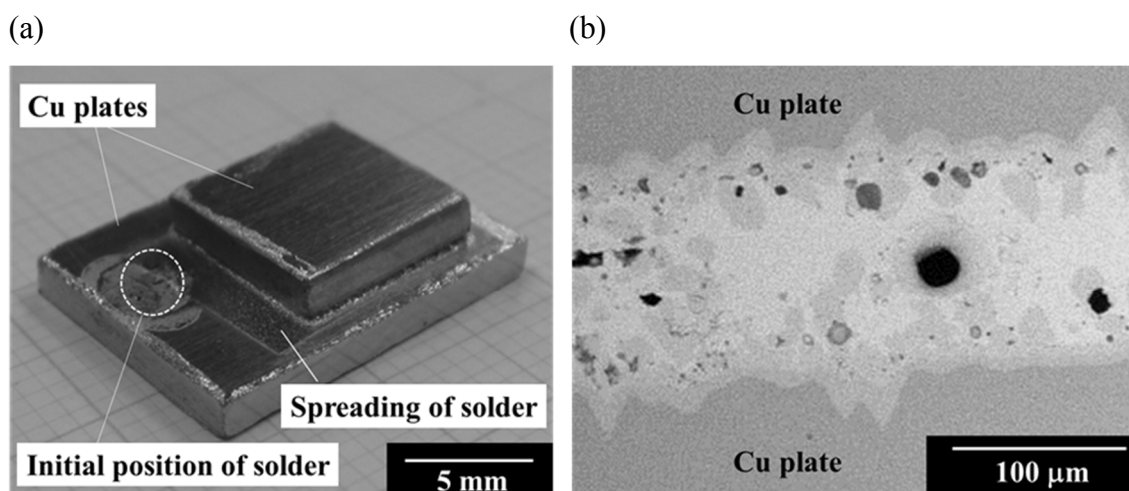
(a) Appearances of sample and (b) sample cross section at joint after joining experiment with Sn–Pb solder.
